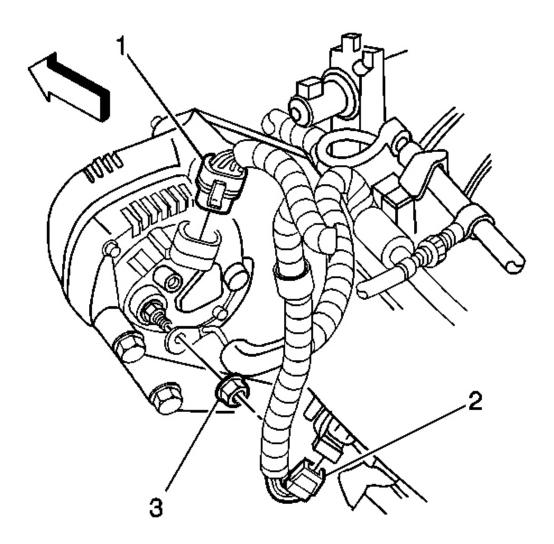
Engine Wiring Harness Generator Lead Nut & Generator Electrical Connector
